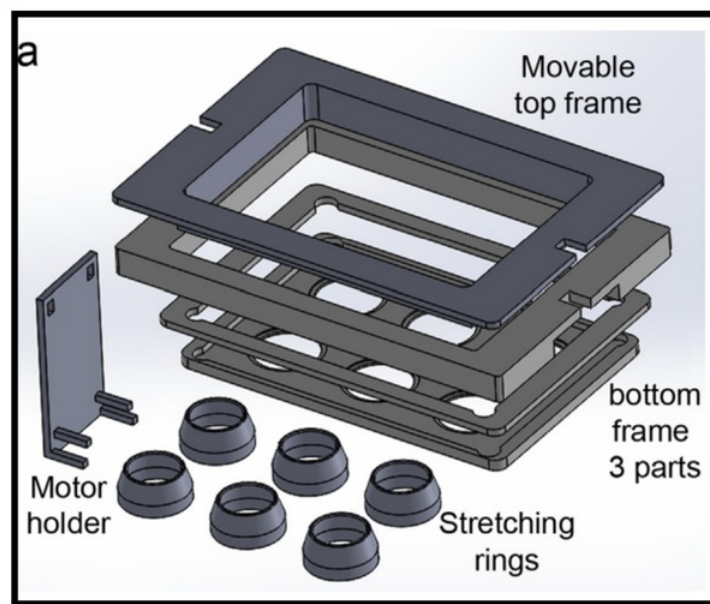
TOUME, GEFEN & WEIHS CAD DESIGNS
